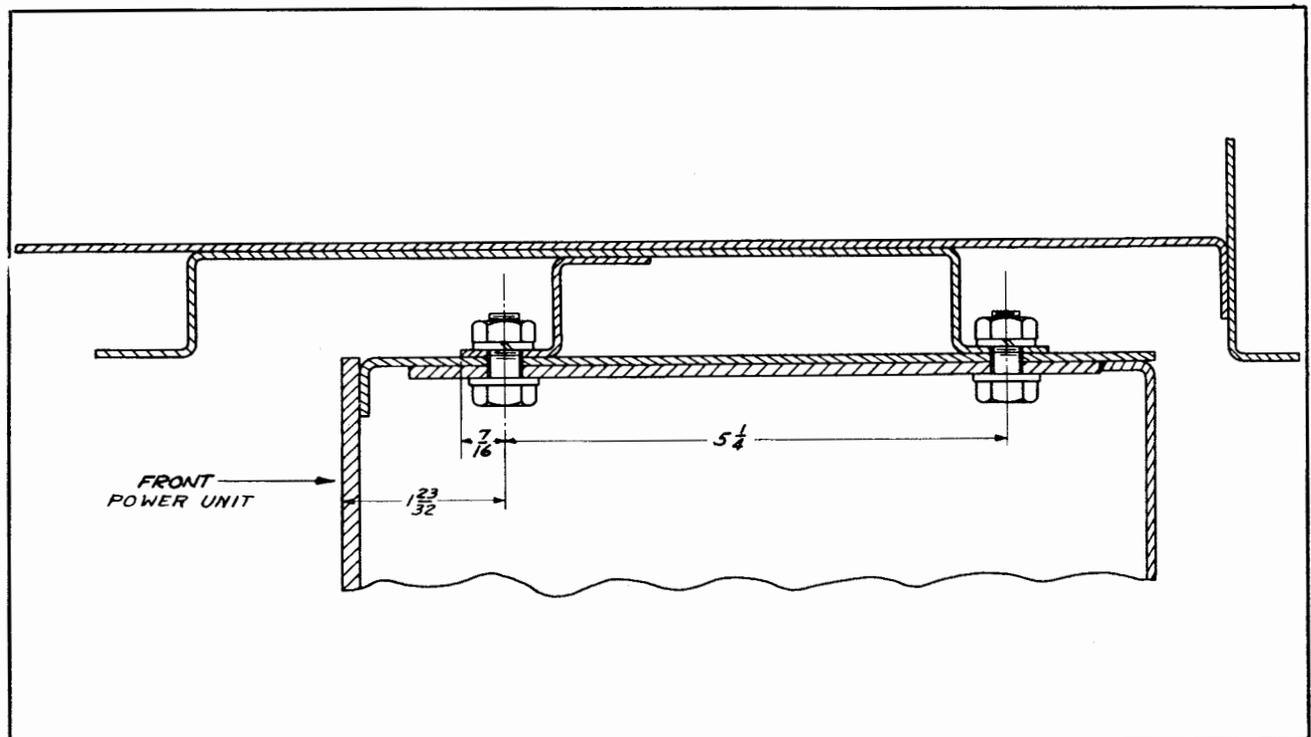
Sectioned Mounting Details from Section AA on Figure 3-9
